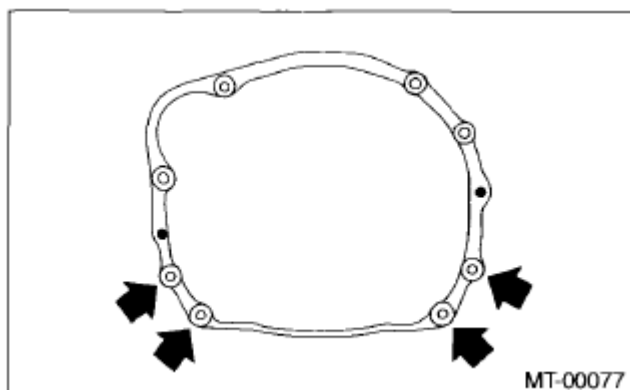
Locating Lower Side Of The Transmission Bolts And Nuts (MT Model)
